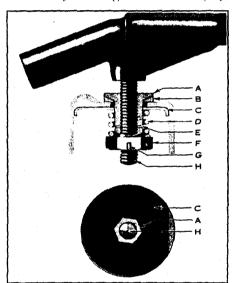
Sectional View of Radiator Support. (Inset shows view from beneath with nut removed.)
